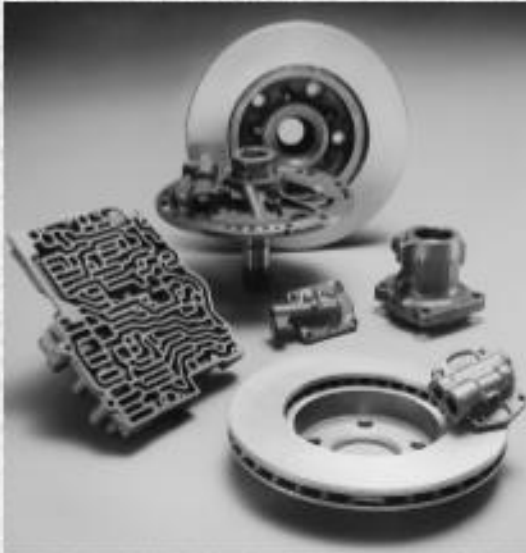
Typical gray-iron castings used in automobiles, including transmission valve body (left) and hub rotor with disk-brake cylinder (front).
